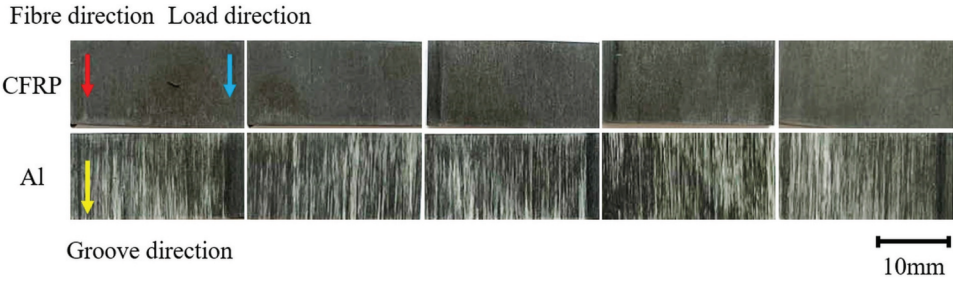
Fracture surfaces of 0°-specimens of SD1_8_UD with the illustration of fibre direction of the first prepreg layer, load direction, and groove direction on the aluminium surface.
